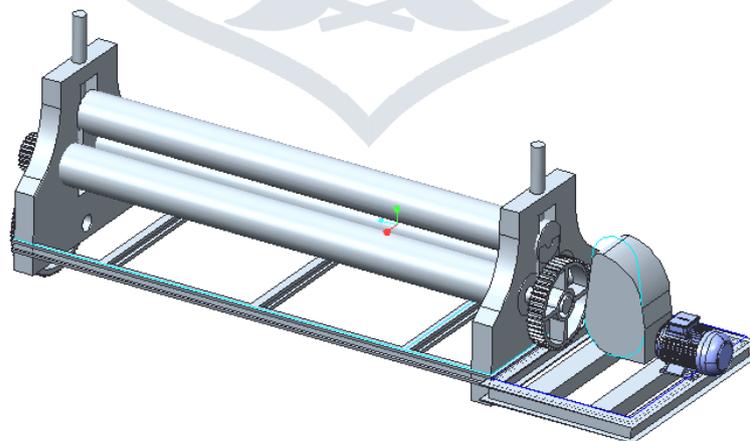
Assembly Modeling of 3 Roller Bending Machine
